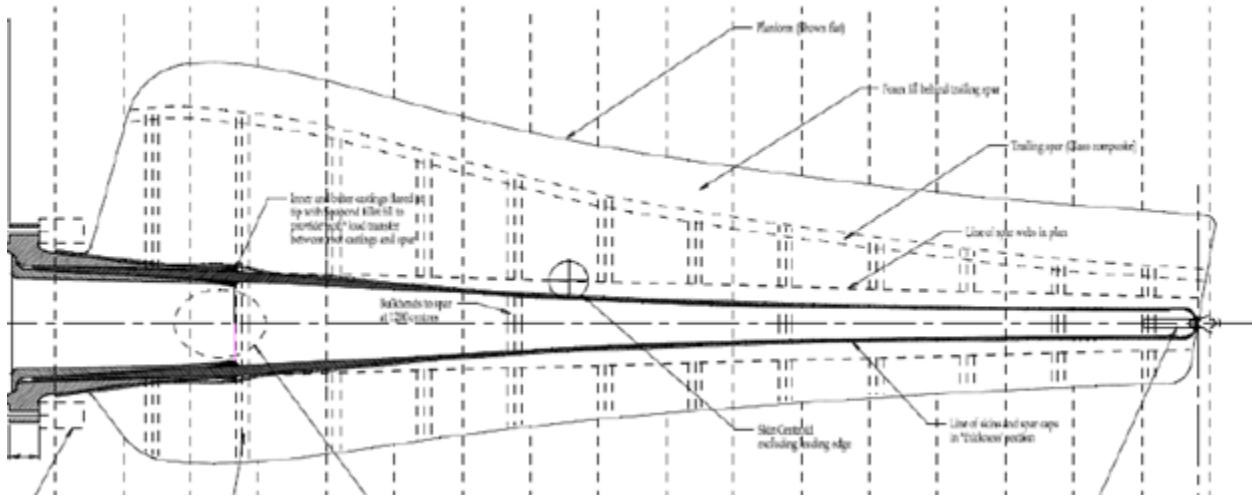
Technical Drawing of the Test Blade Looking from the Top View [2]
